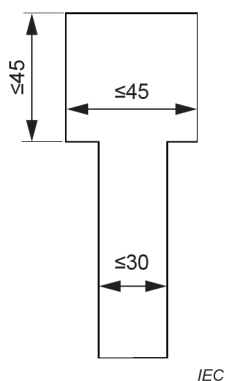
Example 1 – Opening sizes ≤ 45 mm
